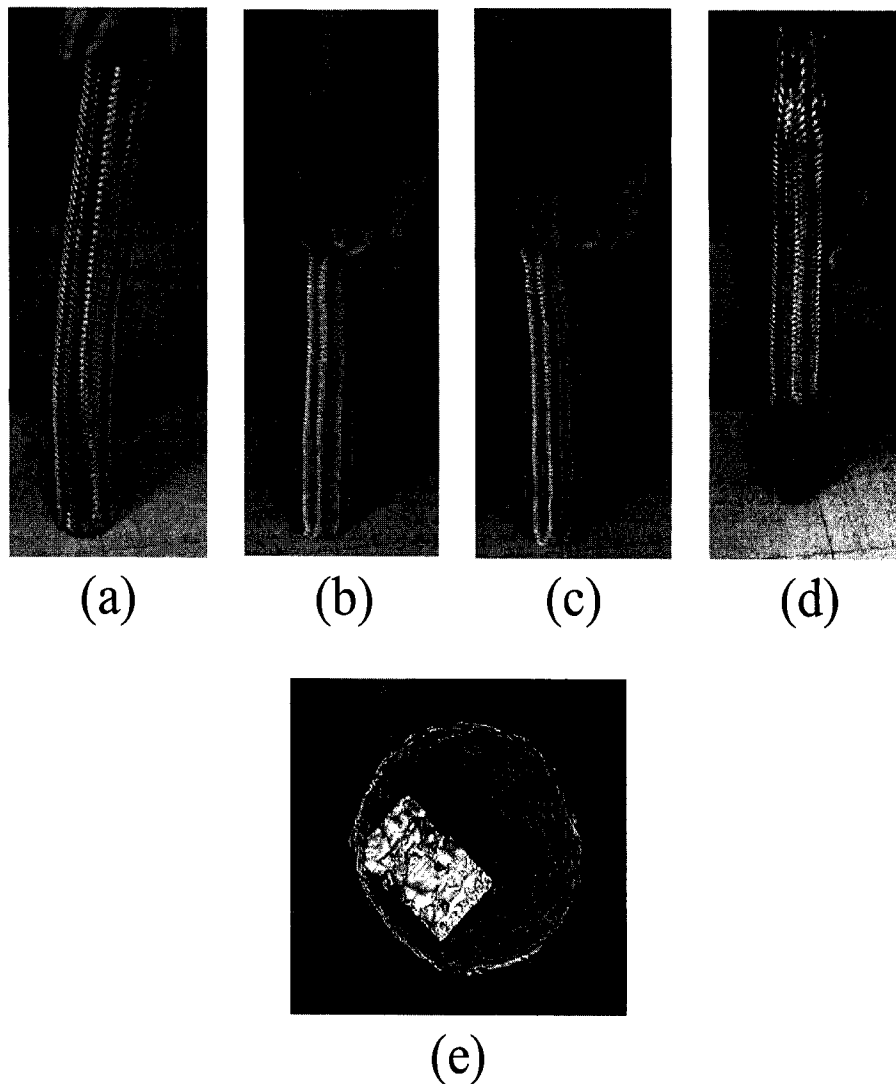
Assembly process of the aluminum foam filled braided tubes.
